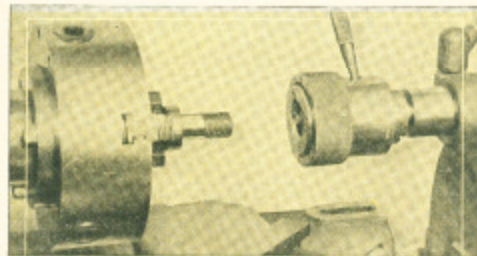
Self-Opening Die Equipment for Rapid Thread Cutting on Manufacturing Job.
